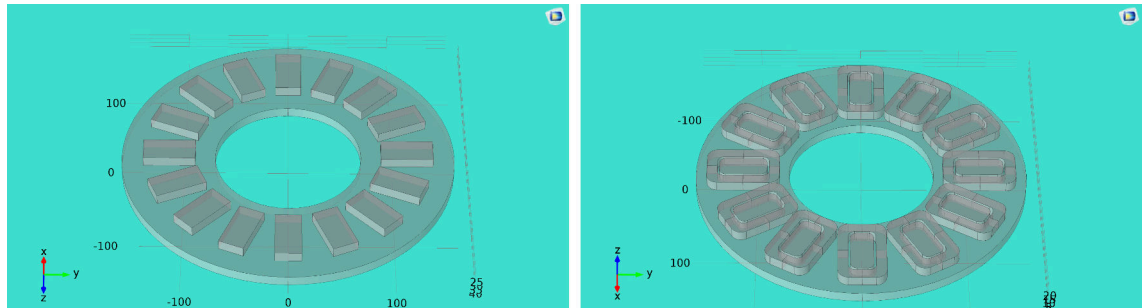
Rotor geometry (Left) and the Stator geometry (Right) of the Axial Flux motor designed in COMSOL Multiphysics software.
